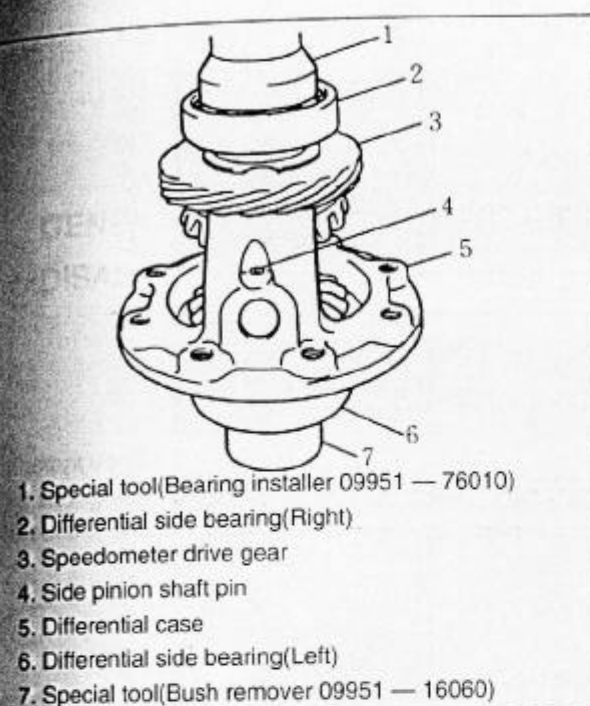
C — 5 PRESS- FITTING DIFFERENTIAL SIDE BEARING
